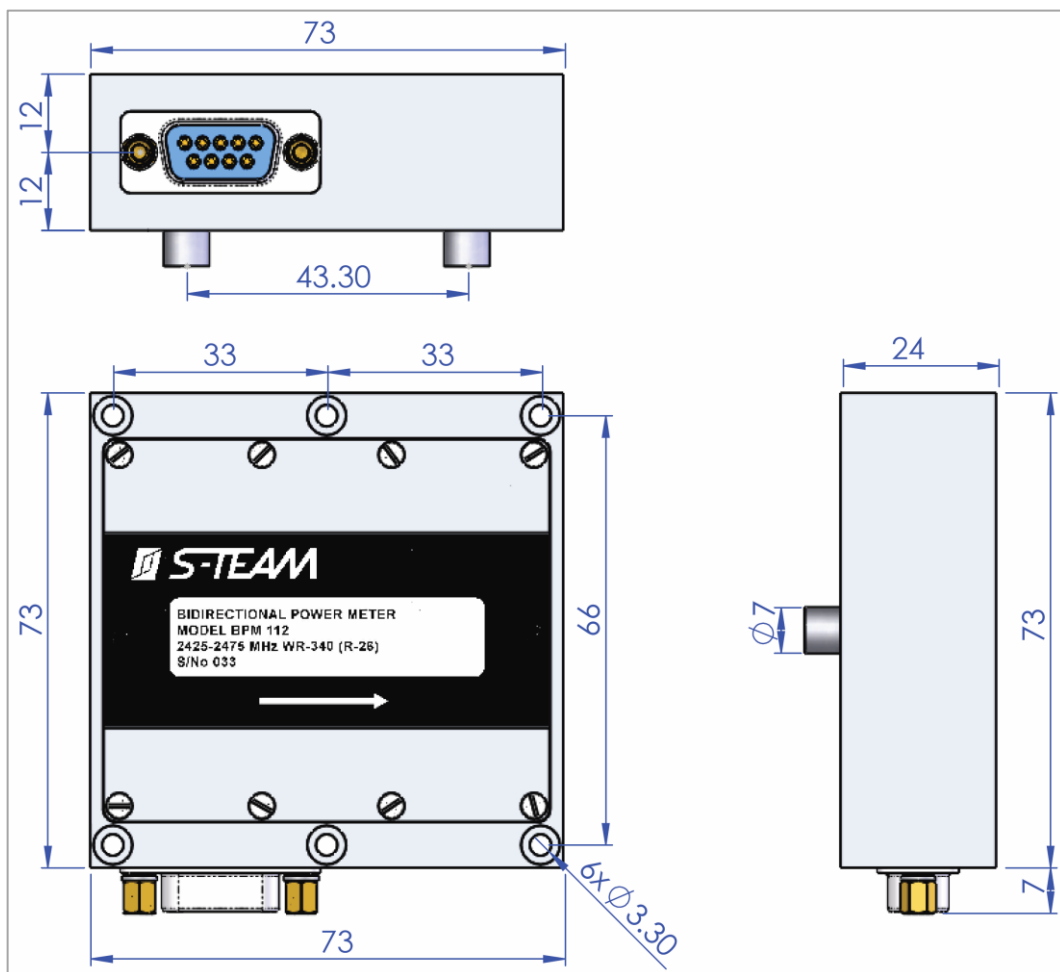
Basic BPM112 dimensions. All dimensions are in millimeters.
